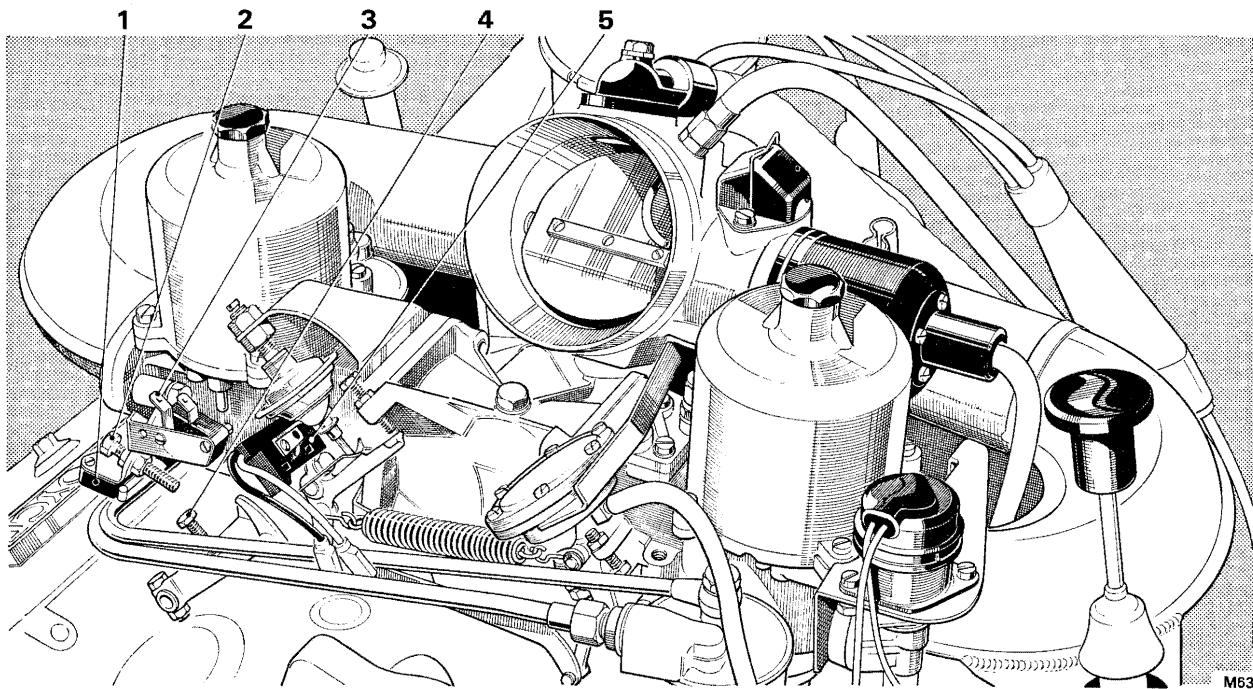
VIEW OF TYPICAL CARBURETTER LINKAGE ARRANGEMENT (Early cars)
